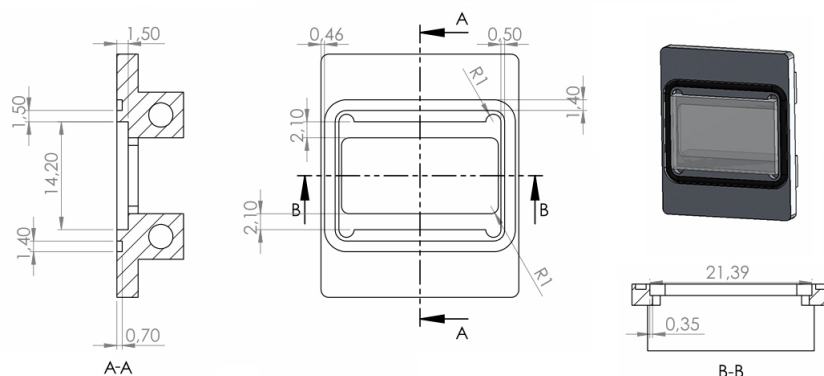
Mount heating concept: CAD drawings of laser window mount including two heating cartridges. Specified dimensions are in mm.⁹
